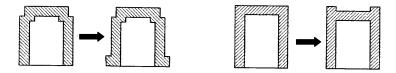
Dimensional stabilize of cylindrical molded product by rib
